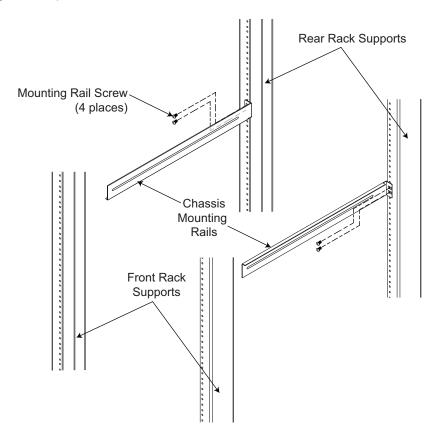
Attaching the Chassis Mounting Rails to the Rear Rack Supports (Inside Mount)
